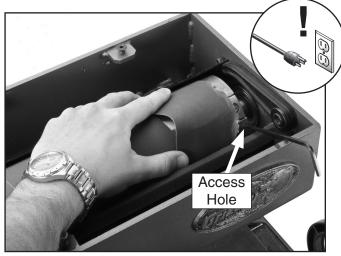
Hex wrench inserted into access hole on right tension wheel.
